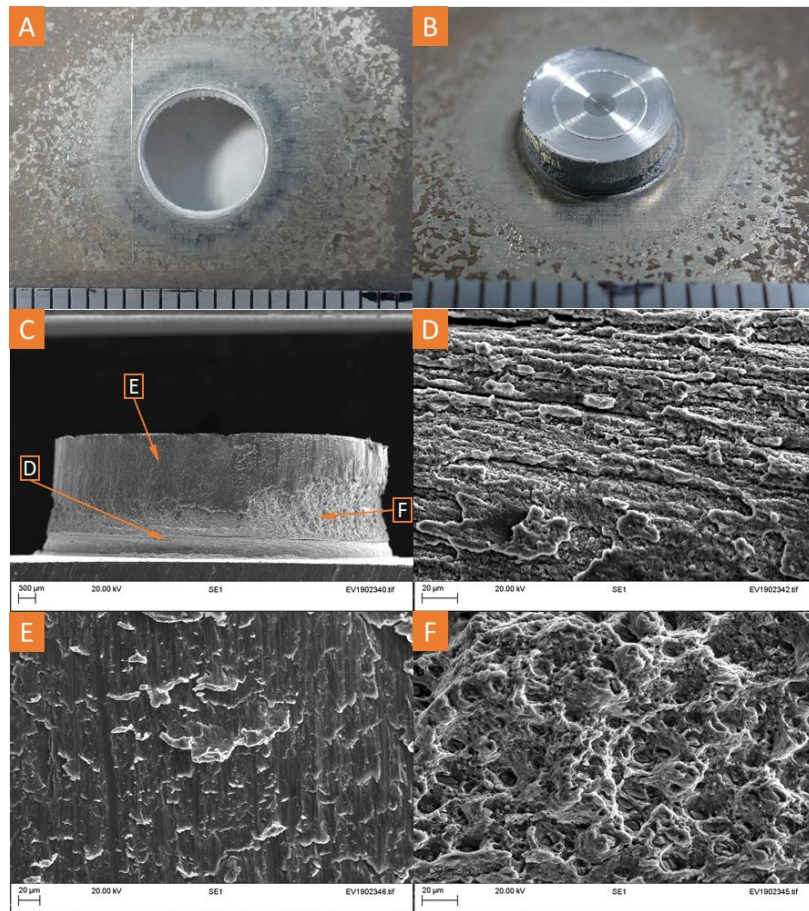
Fracture surfaces of a plug pull out top sheet failure mode of RFSSW AA2024-T3 condition W3 (RS = 1000 rev/min; PD = 2.4 mm) with sealant:
